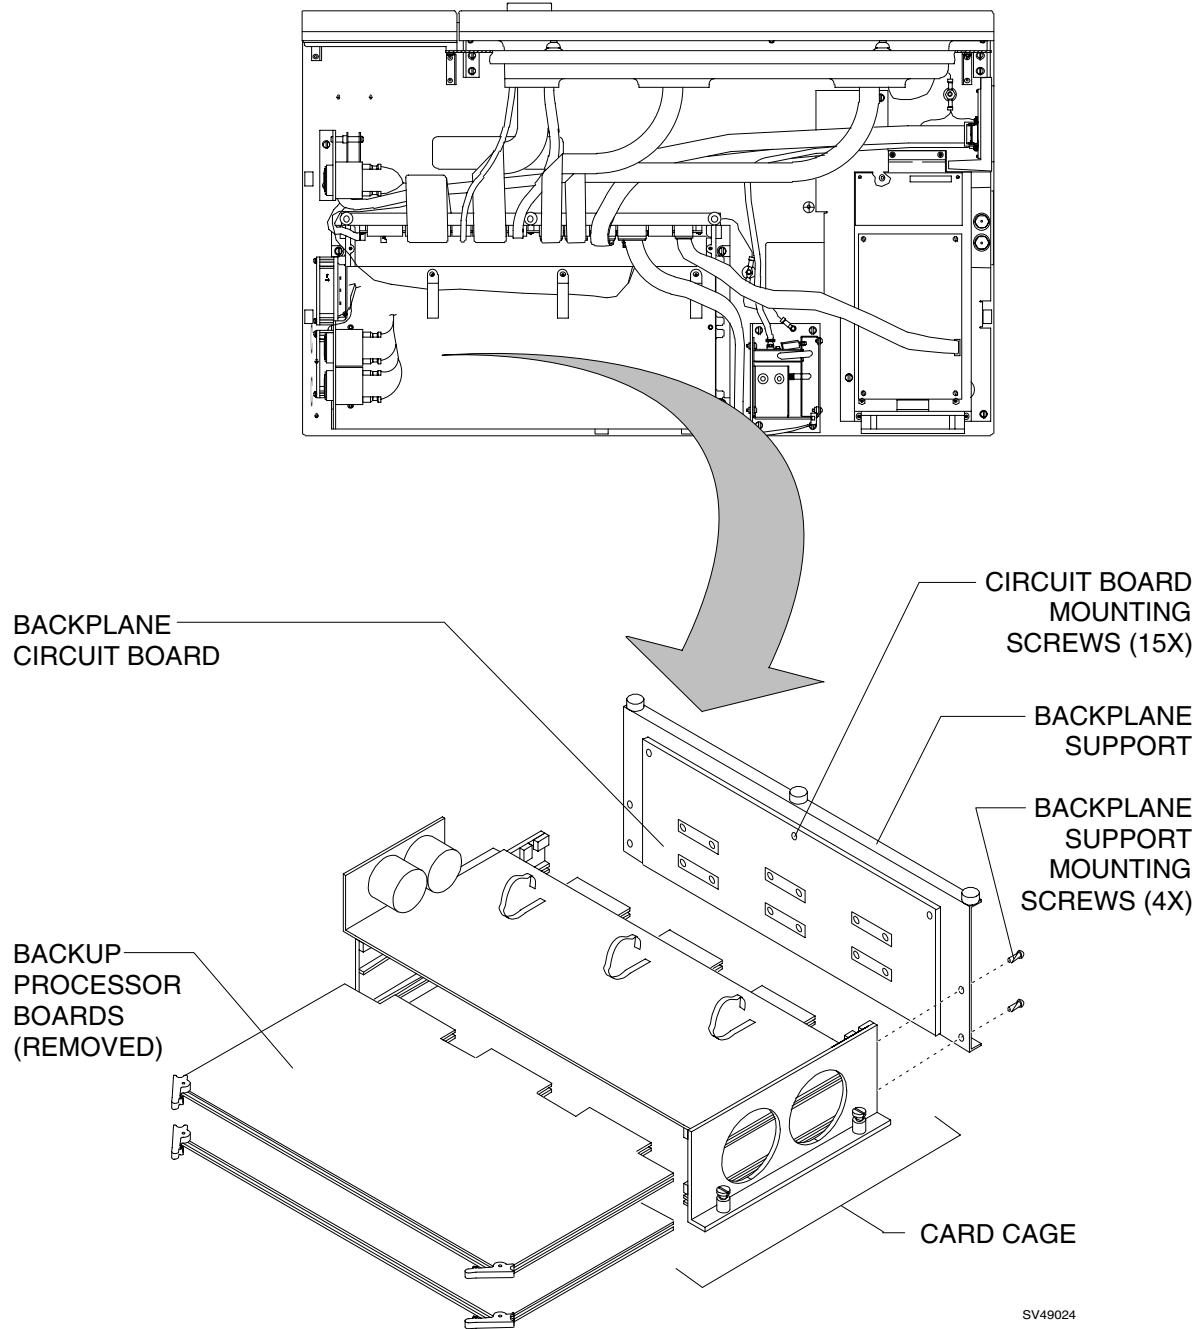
CARD CAGE AND BACKPLANE ASSEMBLY
